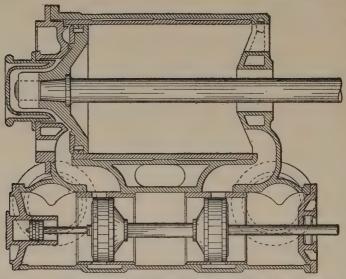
Section of Piston Valve and High-Pressure Cylinder of U. S. S. "Massachusetts" Showing Method of Balancing
